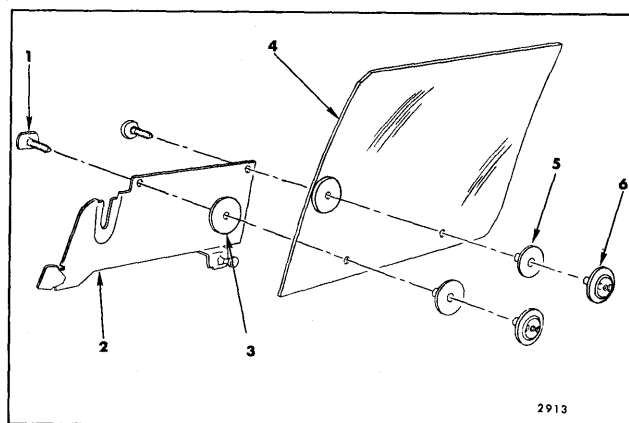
Front Door Window Assembly - "A" Hardtop and Convertible Styles
